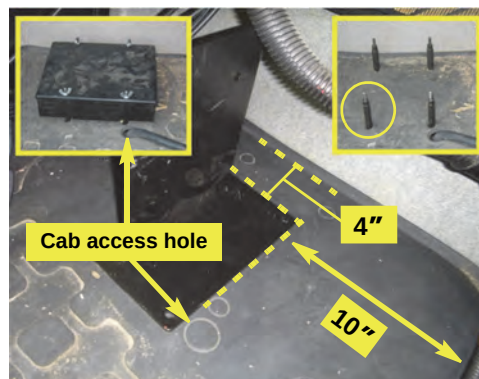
with insets: ECU mounting bracket location prepared and bracket installed
